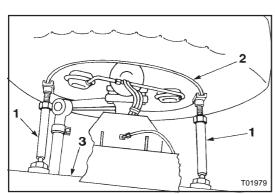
To lock a front wheel in straight ahead position by means of adjustable struts (typical arrangement shown)
